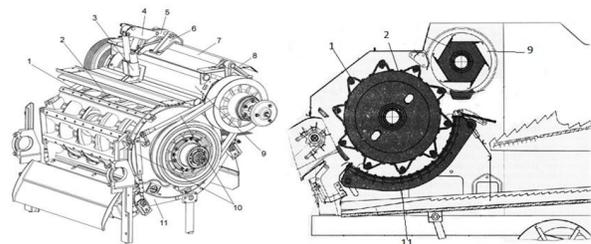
The scheme of a threshing unit of the combine harvester “Amur-Palesse” GS-812Ñ: 1 – free-swinging knife; 2 – threshing drum; 3 – concave electric operating mechanism; 4 – bracket; 5, 8 – levers; 6 – support; 7 – torsion bar axle; 9 – stripper beater; 10 – concave suspensions; 11 – concave.
